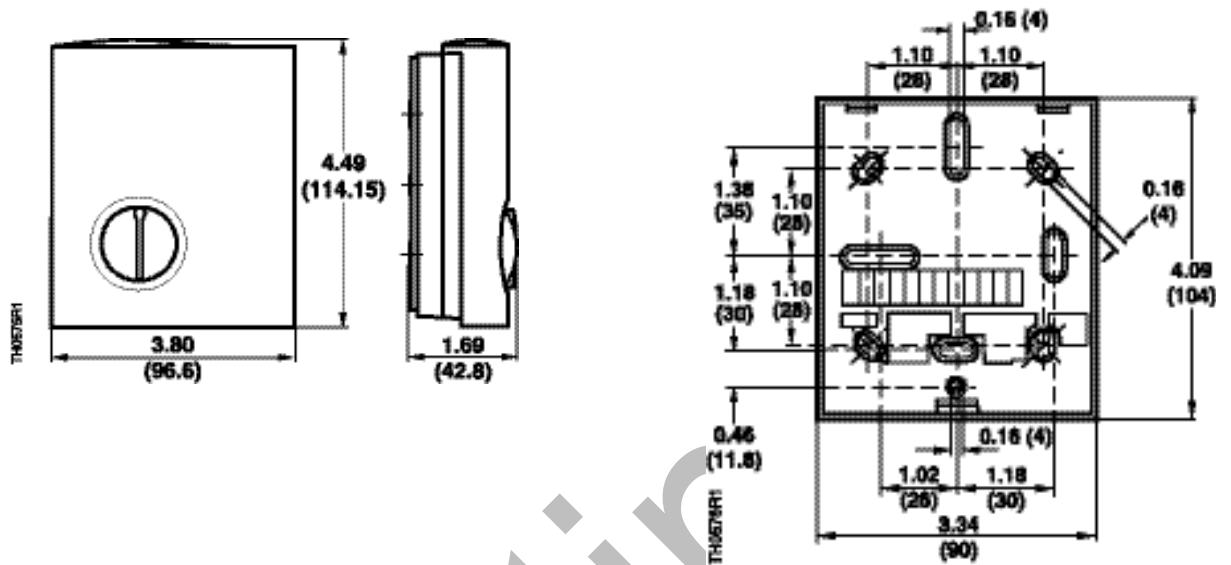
Controller and Baseplate Dimensions in Inches (Millimeters).
